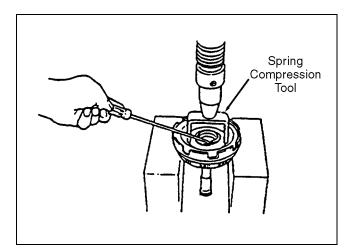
J-15. Forward Clutch Reassembly ó Step 12
